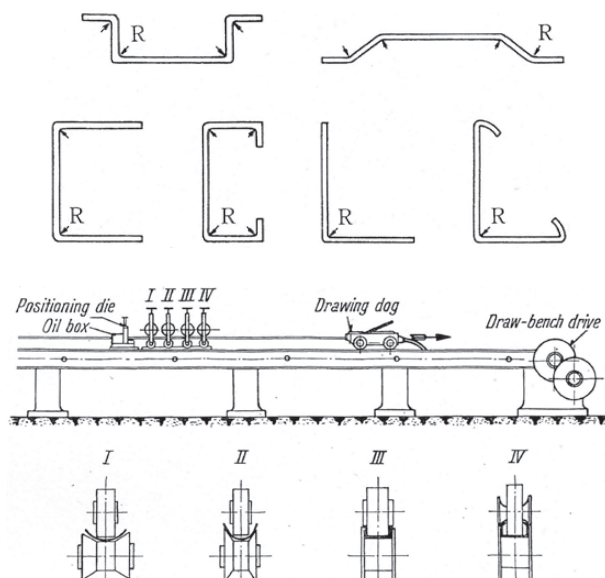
Shapes of profiles and roll forming machine¹⁰⁾.
